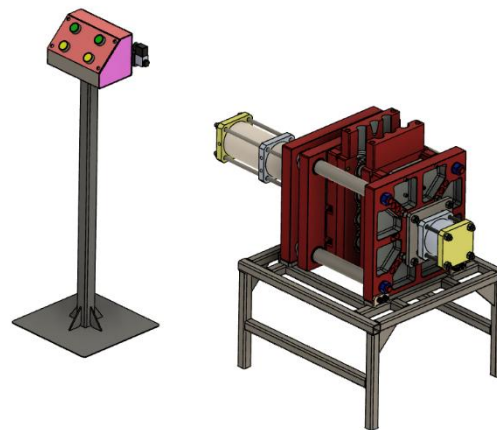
Isometric view of the pneumatically actuated gravity casting machine
